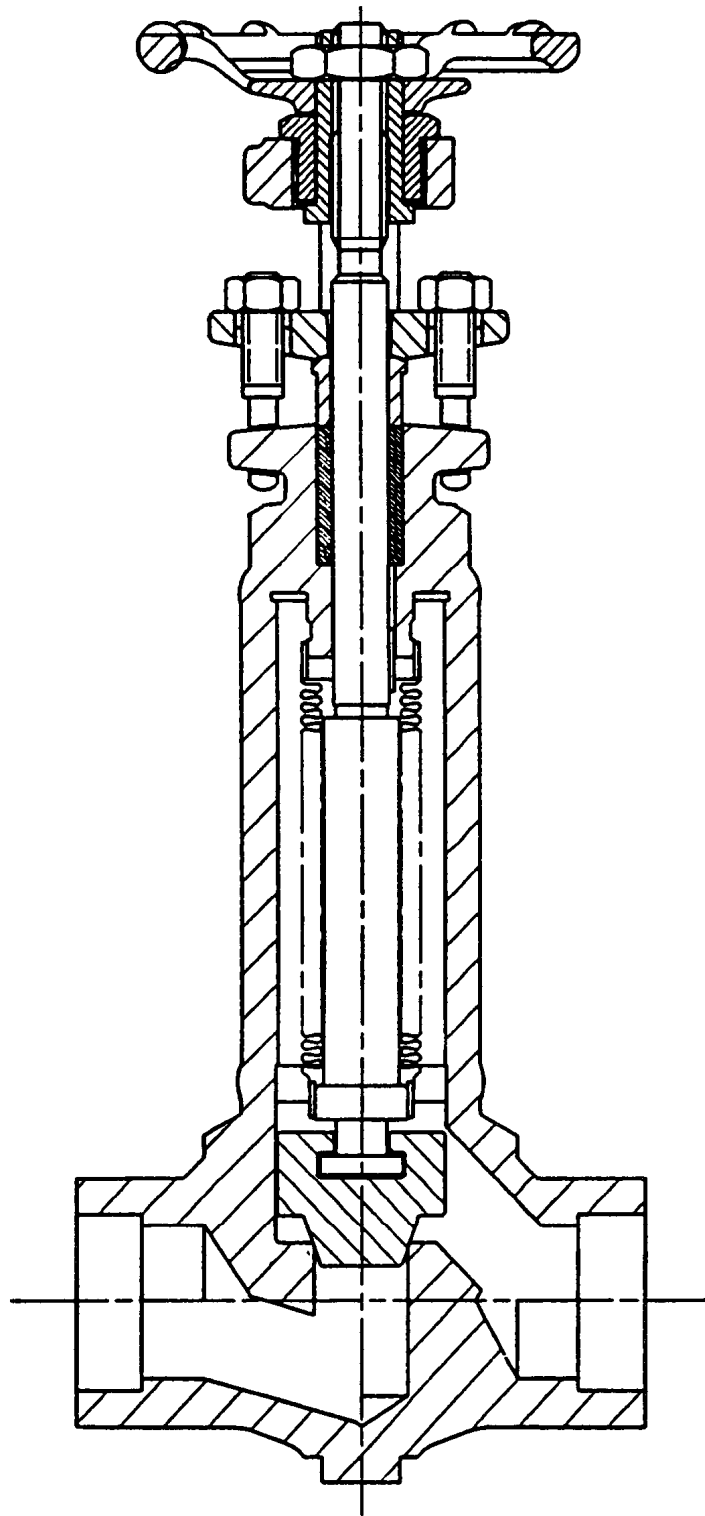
Typical Bellows Stem Seal Arrangement
